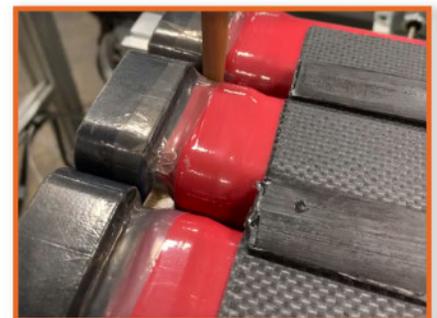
Custom molded noodles fitted in-between Smart Tools to create flush surface
